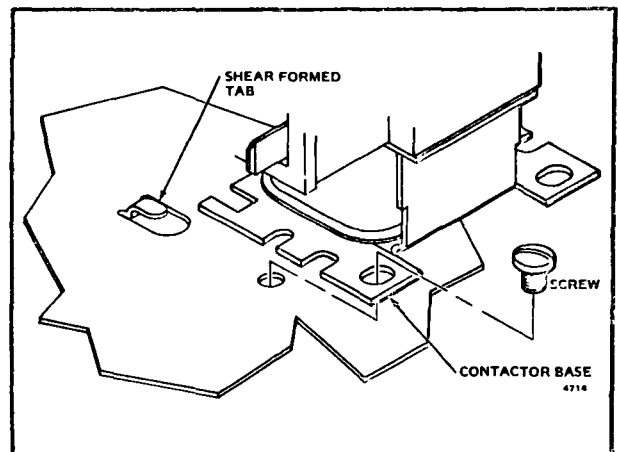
MOUNTING RELAY ON PANEL WITH SHEAR FORMED TAB AND 1 SCREW.
